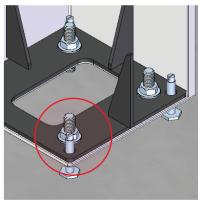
, Level with leveling screws provided. After unit is level, tighten mounting bolts completely.
